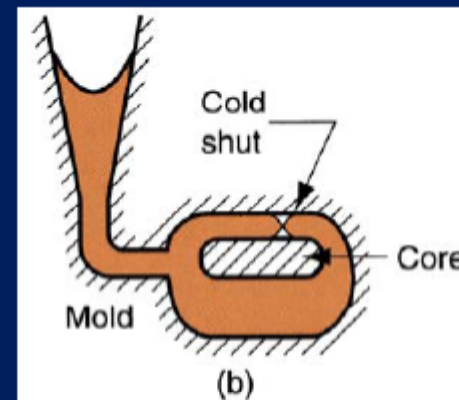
Some common defects in castings: (b) cold shut
